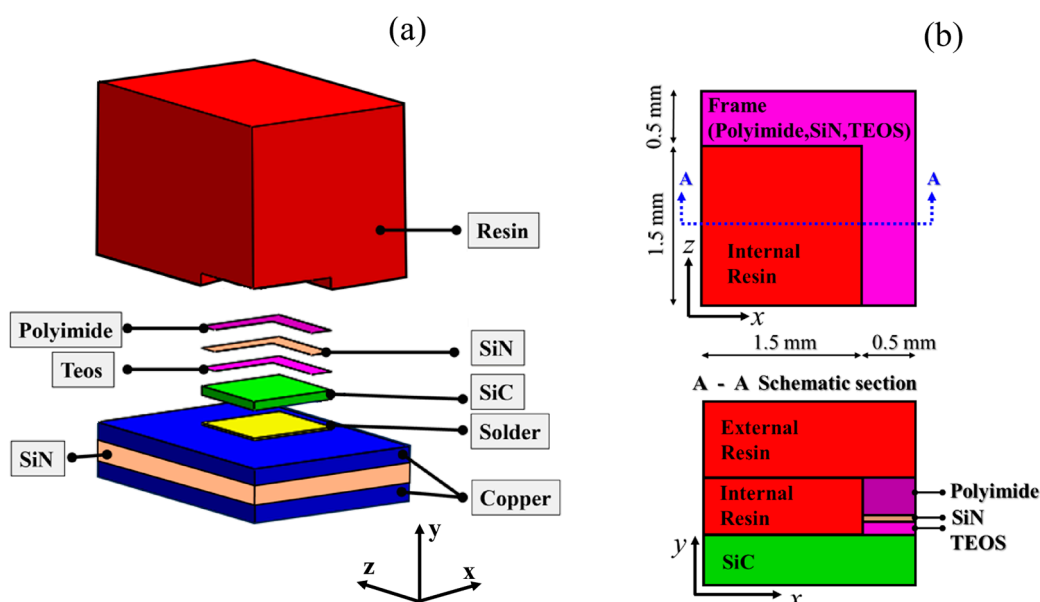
(a) Exploded isometric view of the central zone of the model; (b) detailed views of the multilaminae assembly incorporating SiC, TEOS, SiN, polyimide, and resin. Only a quarter of the assembly is considered thanks to the symmetries.
